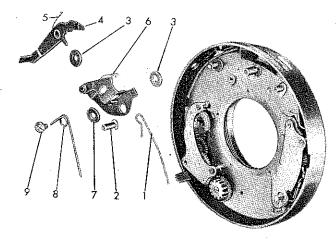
Parts on Shutter Mechanism Plate, Partially Exploded (II)
